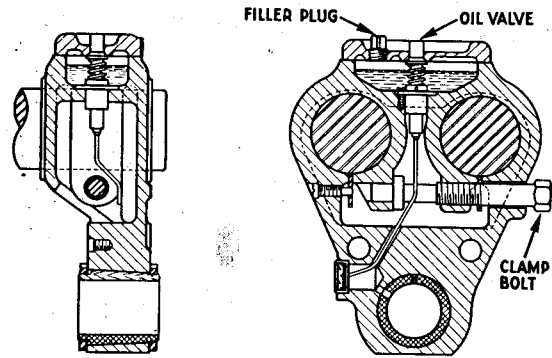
Sections through arbor yoke show valve and reservoir for oiling adjustable arbor bushing, and illustrate method of securing equalized clamping to overarms.
